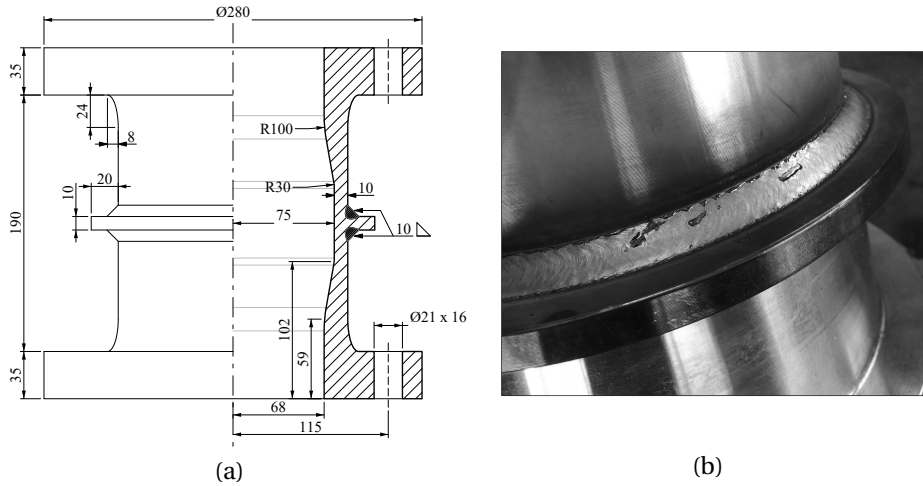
Specimen geometry dimensions in [mm] (a) and weld detail (b).
